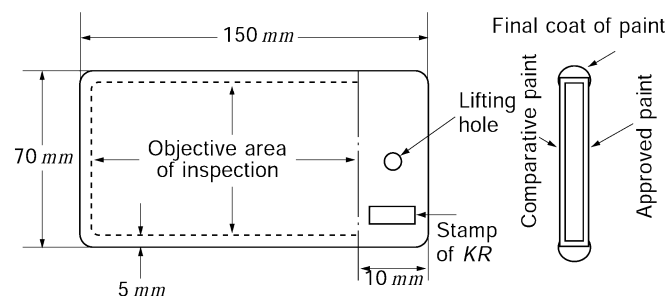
Test Coupon for Corrosion Resistance Test
